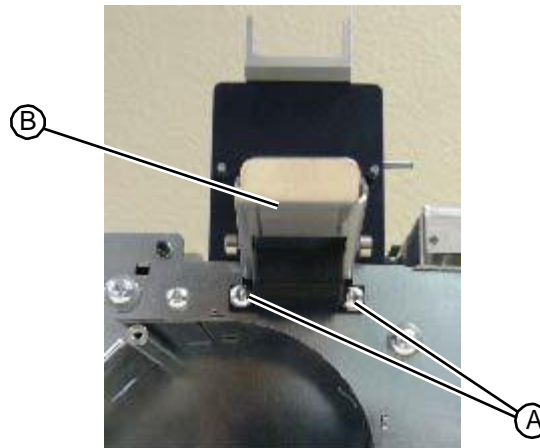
Mounting and locating holes on front of the tester assembly
